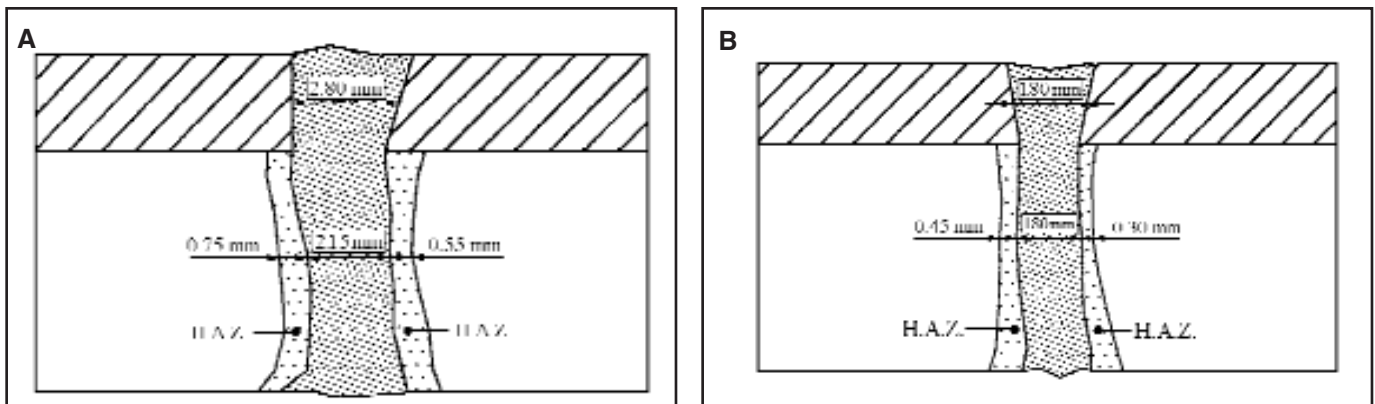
Sketches of the welded sections: A — dual LBW; B — single-side LBW.
